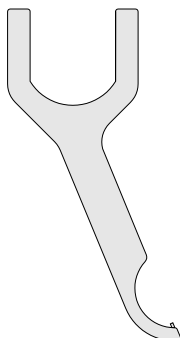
Optional wrench that allows mounting of the WaveGuide radar (Part no. WG-EX-tool).
